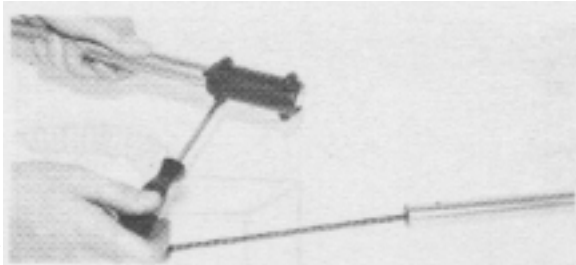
Loosen all four corners of Split Boom Coupling as to allow lower portion of Boom to be assembled.
